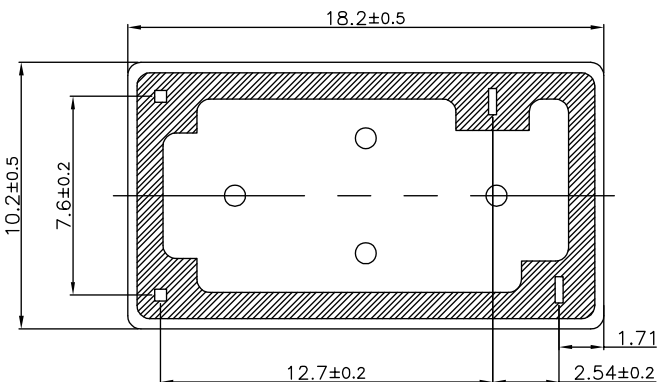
FIGURE FOR PRINTED CIRCUIT BOARD PROCESSING (BOTTOM VIEW)
